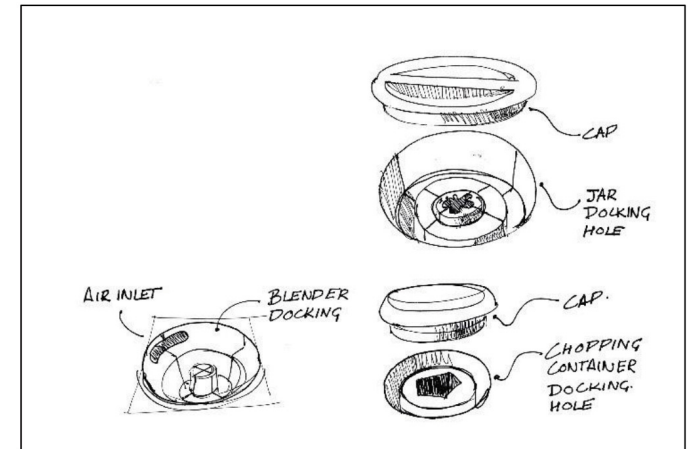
Docking holes on the base unit for blender, jar and cutting container
